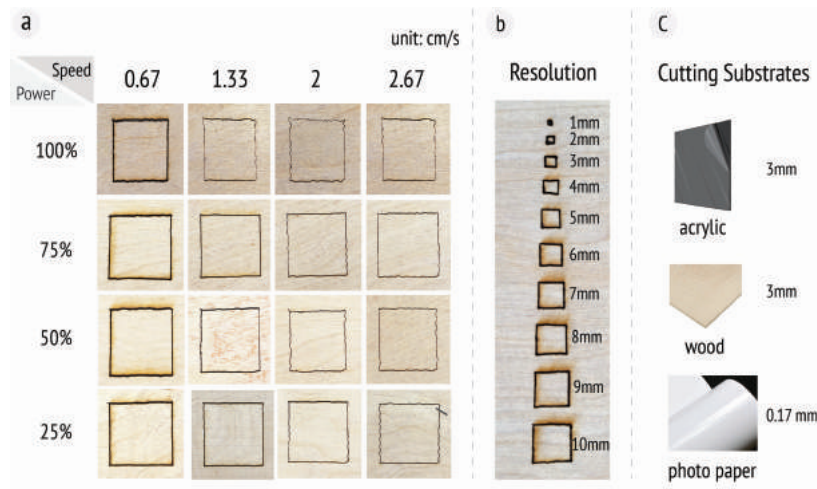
laser cutting head testing: (a) Speed and power testing. (b) Resolution testing. (c) Substrates that laser cutting head can cut.
